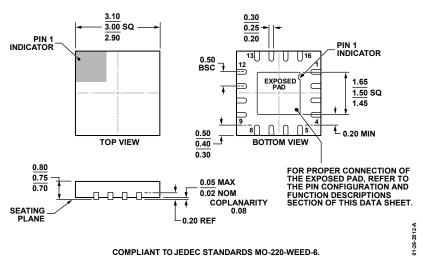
16-Lead Lead Frame Chip Scale Package [LFCSP] 3 mm × 3 mm Body and 0.75 mm Package Height (CP-16-27) Dimensions shown in millimeters
